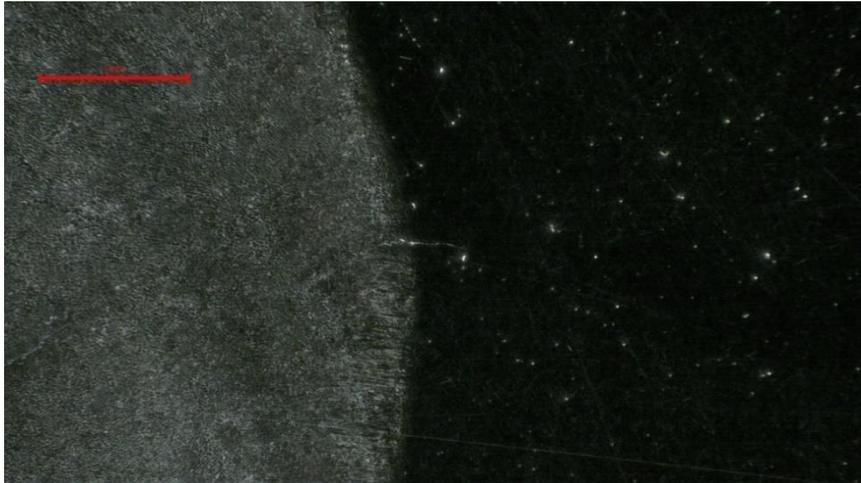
Crack in the weld's beginning on second test specimen.
